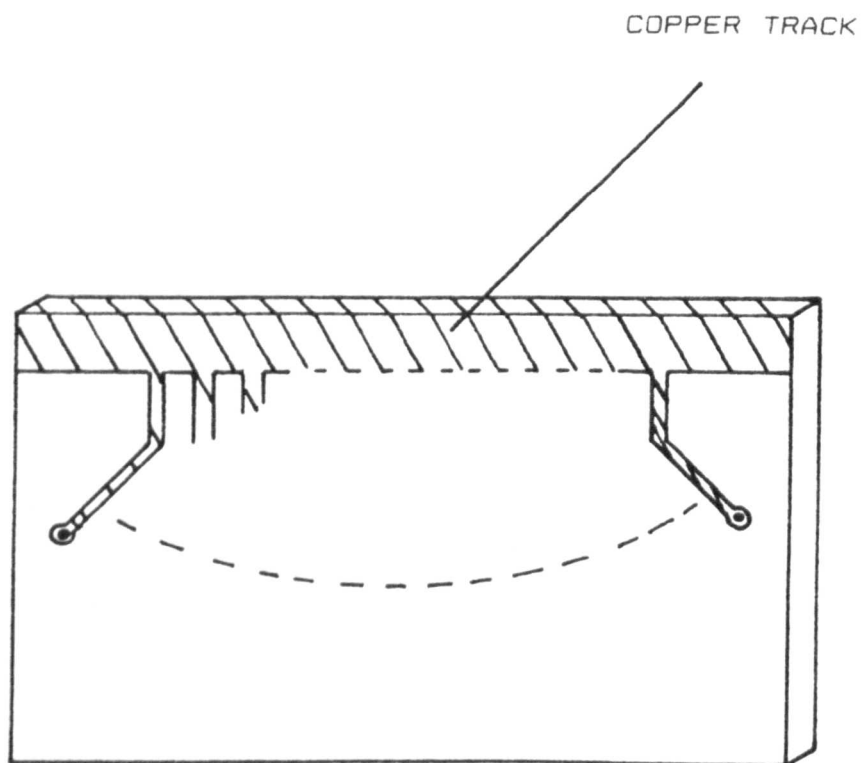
The printed circuit board used for making electrical connection to the array elements.
